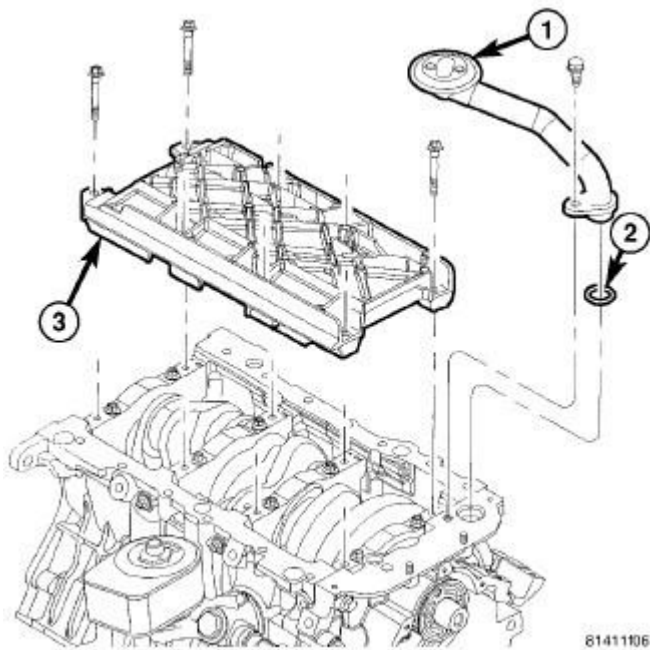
OIL PICK UP TUBE & WINDAGE TRAY
